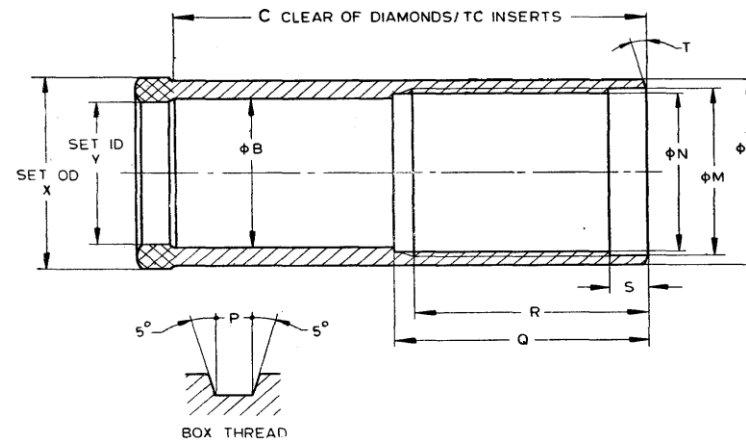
'W' DESIGN FLUSH JOINTED CASINGS — CASING BIT
